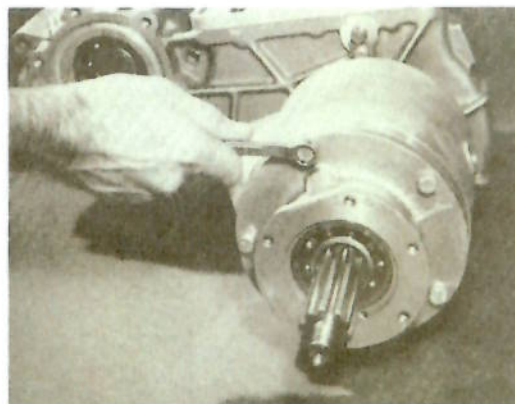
FASTENING THE OVERDRIVE REAR HOUSING TO THE FORWARD HOUSING WITH THE FLAT LOCATED AS SHOWN.
